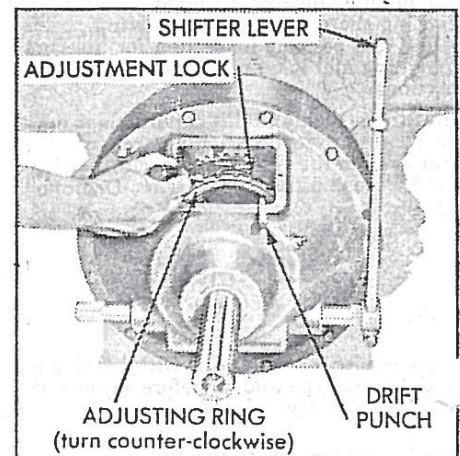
, VG4D, V465D ROCKFORD CLUTCH ADJUSTMENT
